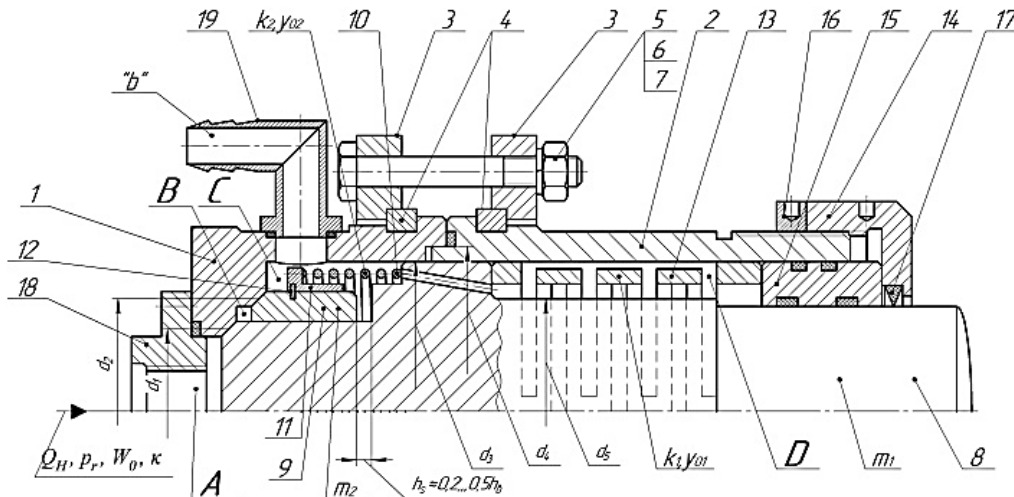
Design scheme of a small-sized hydraulic pulse vibrator with a built-in valve pressure pulse generator: 1 – housing body; 2 – sleeve-hydraulic cylinder; 3 – flanges; 4 – half rings; 5 – bolts; 6 – nuts; 7 – spring washers; 8 – plunger; 9 – sleeve; 10 – twisted spring; 11 – stepped sleeve; 12 – spring ring; 13 – slotted spring; 14 – cap nut; 15 – cylindrical sleeve; 16 – nut; 17 – dirt remover; 18 – plunger rod; 19 – nipple (*A* – chamber; “*b*” – hole; *B* – intermediate chamber; *C* – drainage cavity; *D* – cavity; d_1, d_2 – average diameters, m; d_3, d_4, d_5 – structural diameters of the sleeve and plunger, m; $h_2 = 0,2...0,5h_0$ – gap, m; k_1 – stiffness of the slotted spring, N/m; m_1, m_2 – masses, kg; p_r – energy carrier pressure, Pa; Q_H – flow rate, m³/s; W_0 – original volume, m³; y_{01} – preliminary deformation of the slotted spring, m; y_{02} – pre-strain of the twisted spring, m; κ – effective bulk modulus, Pa)
